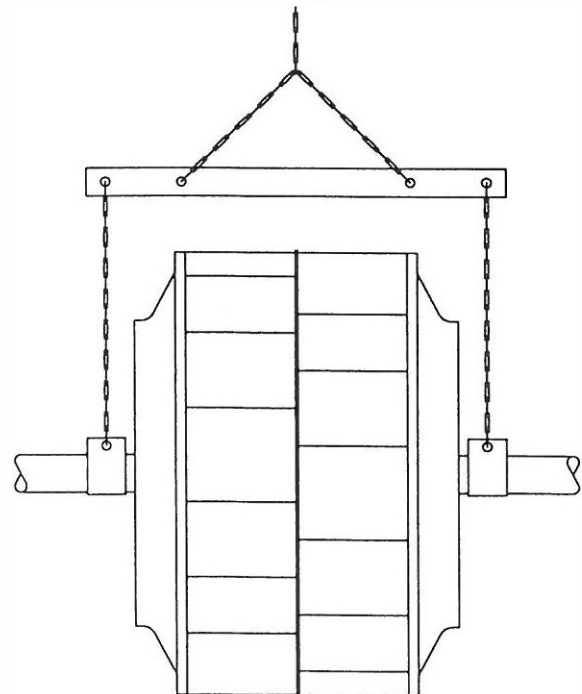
Correct use of spreader bar when lifting centrifugal rotor assembly.
